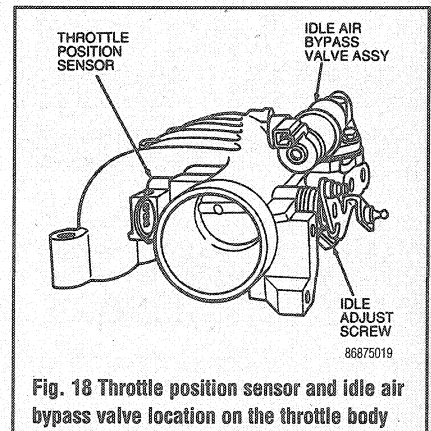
Throttle position sensor and idle air bypass valve location on the throttle body
